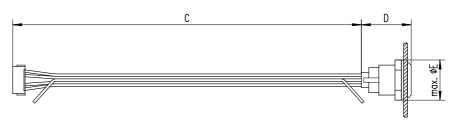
Measurement Drawing—Interface Cable KA41, Prop. 2
